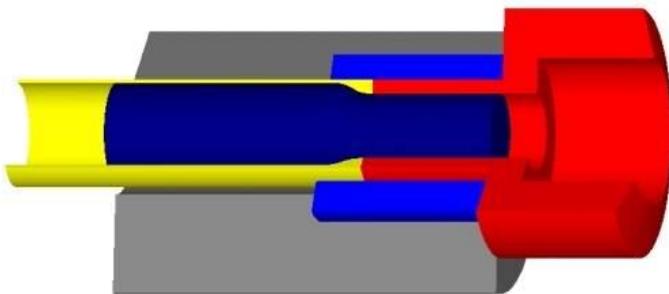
Cold forming extrusion (Courtesy: IMI Yorkshire Fittings)
